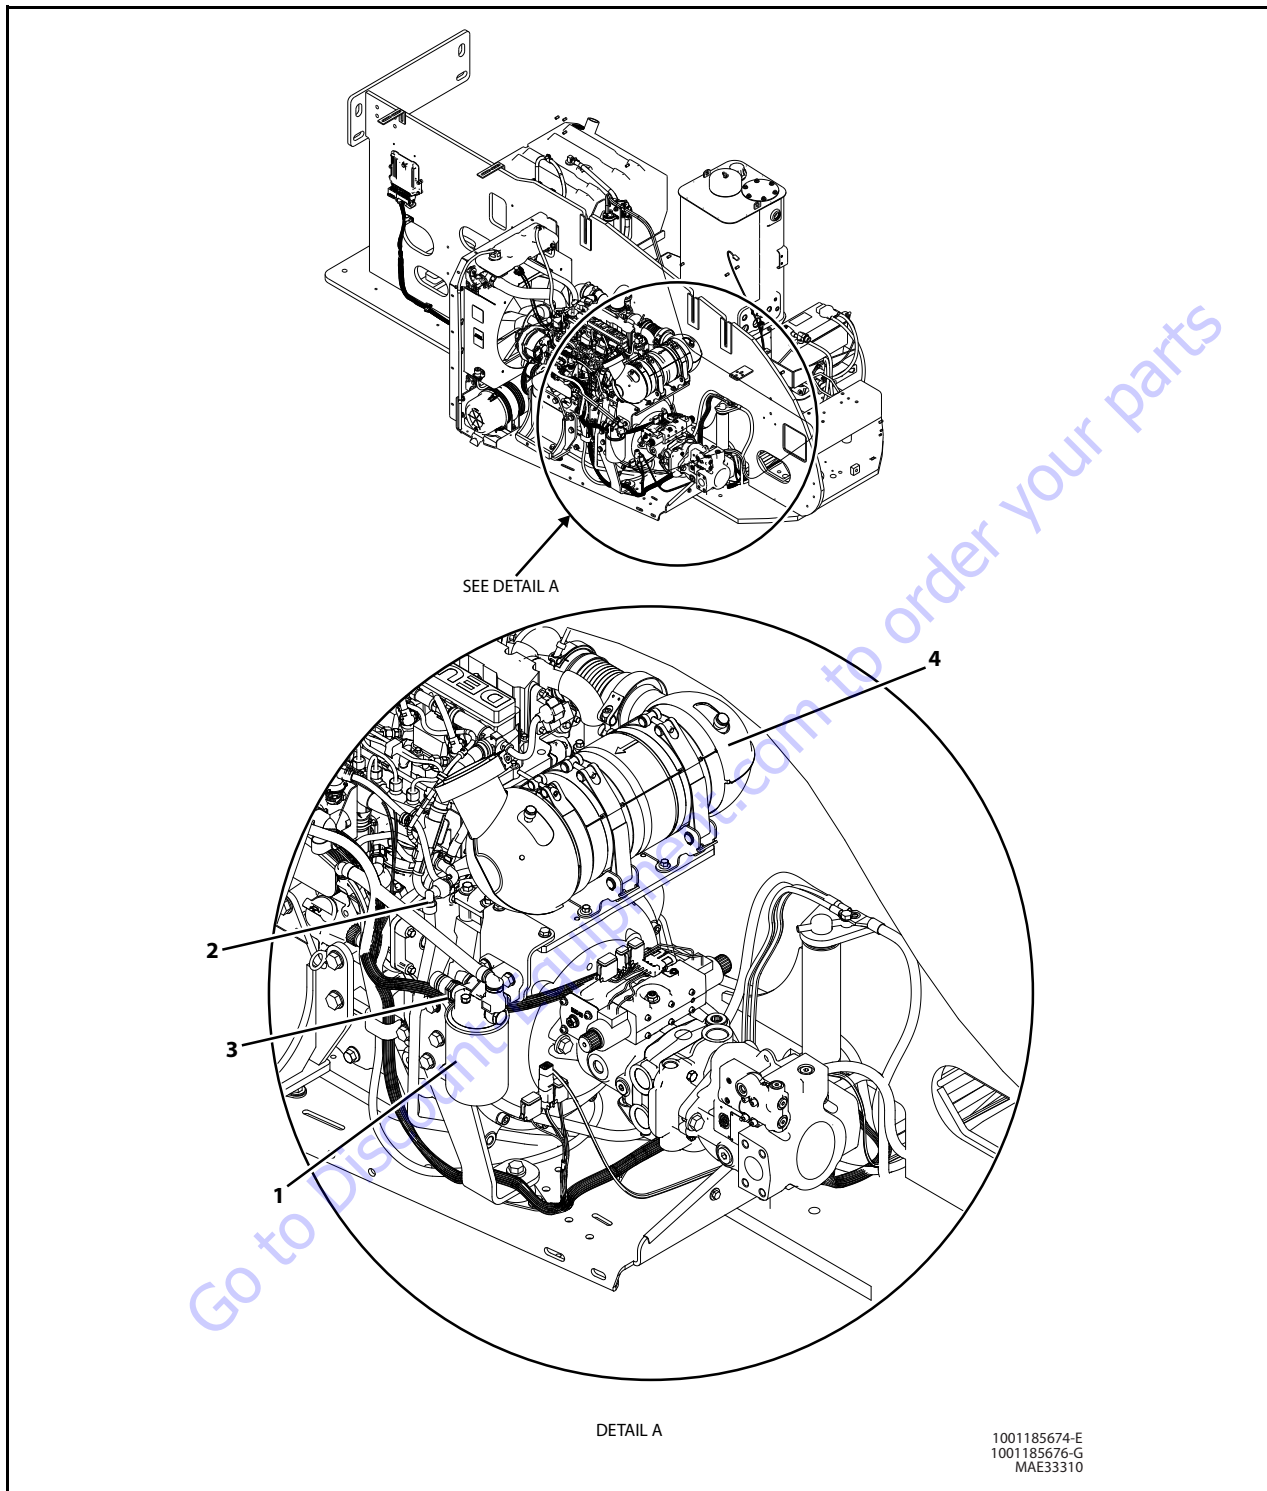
Deutz T4F TD2.9L Engine Components - Sheet 2 of 3
